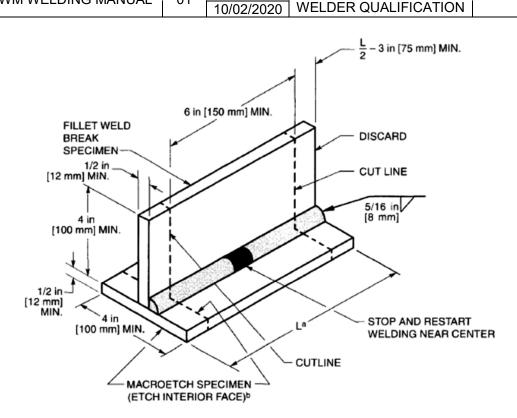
Plate to plate fillet Weld Specimen
